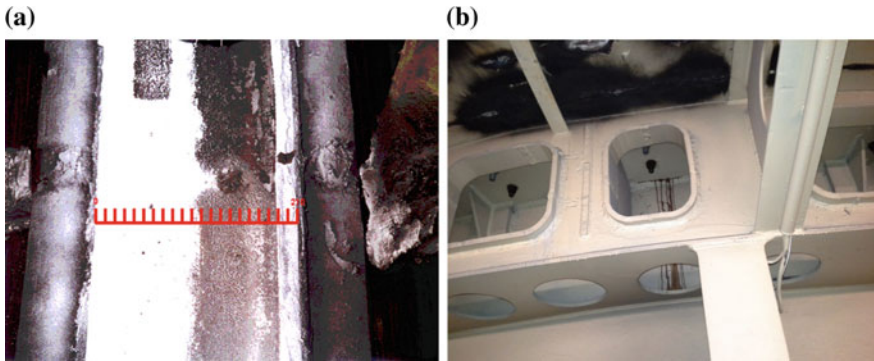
Slewing wheel support of a bucket-wheel excavator: a lack of alignment in the contact between the bogie wheels and the raceway; b fatigue cracks in the slewing wheel support
